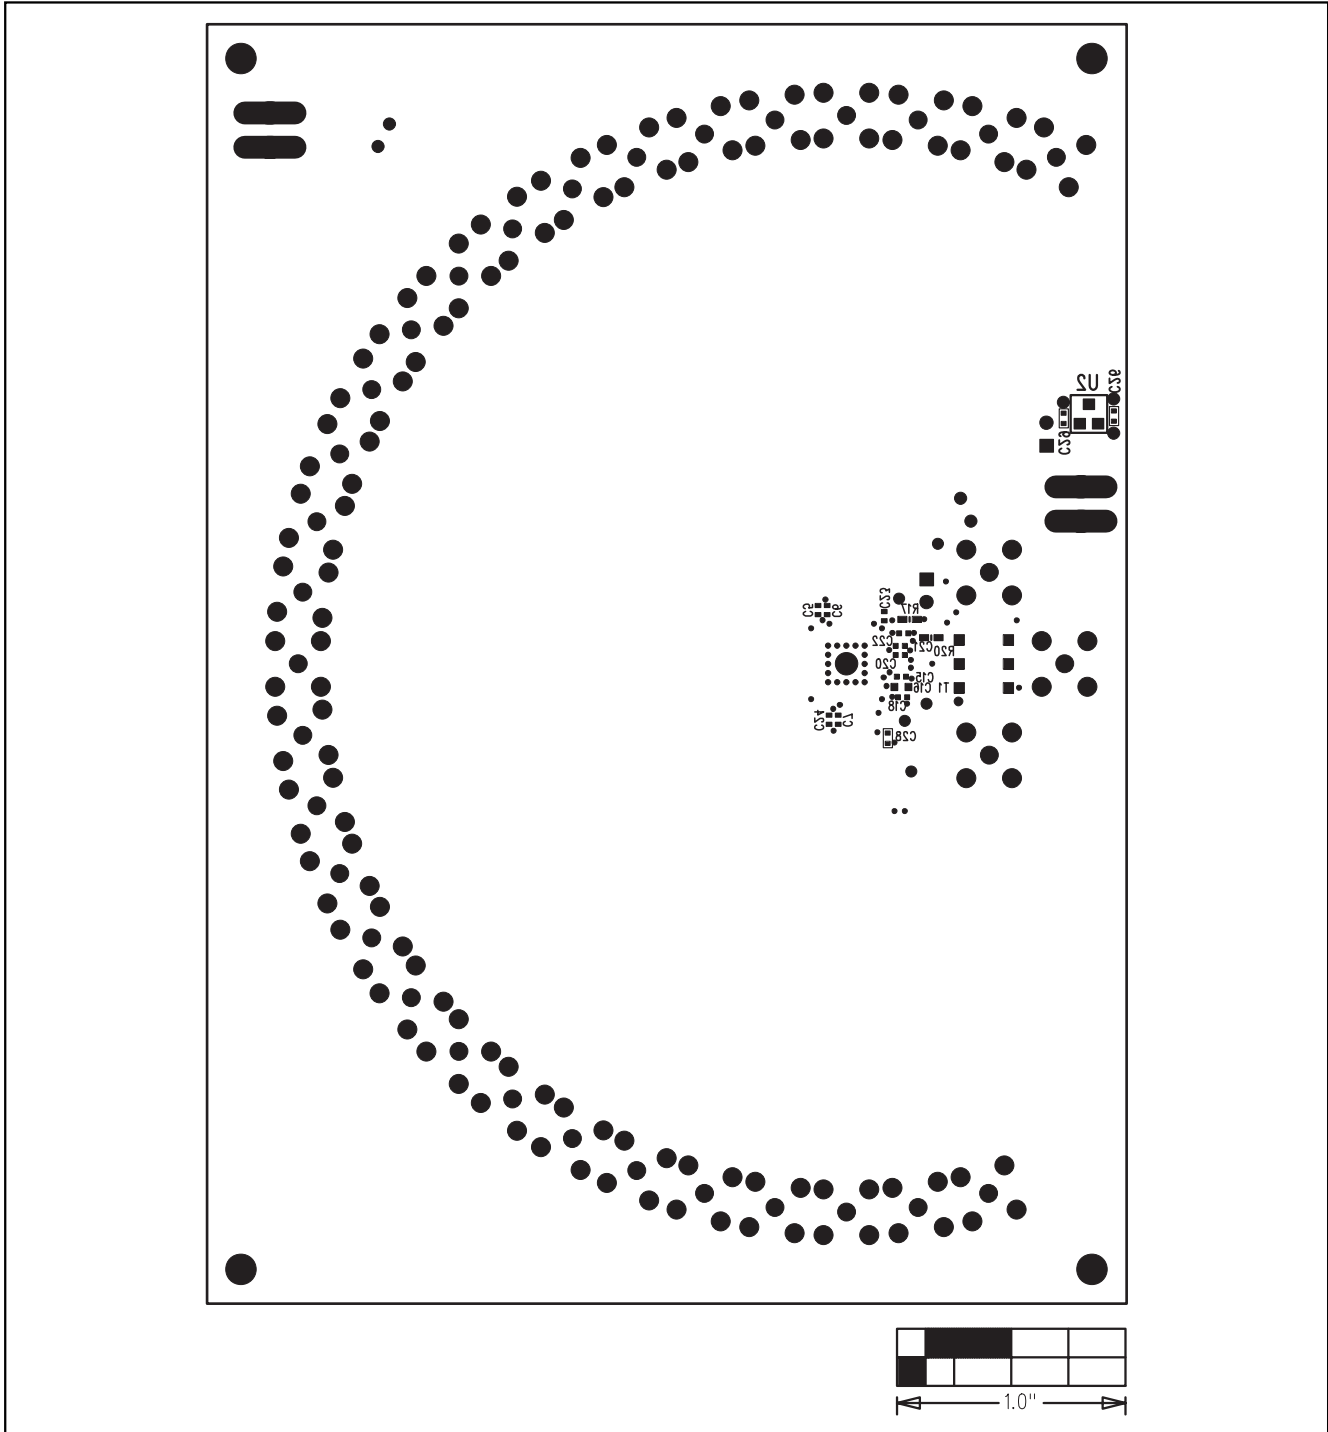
MAX5195 EV Kit Component Placement Guide—Solder Side
